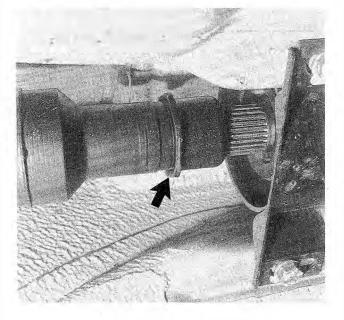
Clamping sleeve for sliding coupling (arrow) to be loosened.
